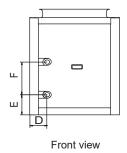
Outline dimensional of MC-SU90-RN1L
